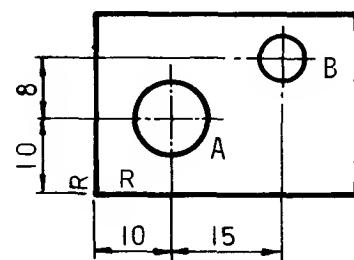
, 2 and 3 show how to dimension a component when location is necessary. The features can be located from a machined surface or centre line. Such a surface or line is known as a DATUM.
